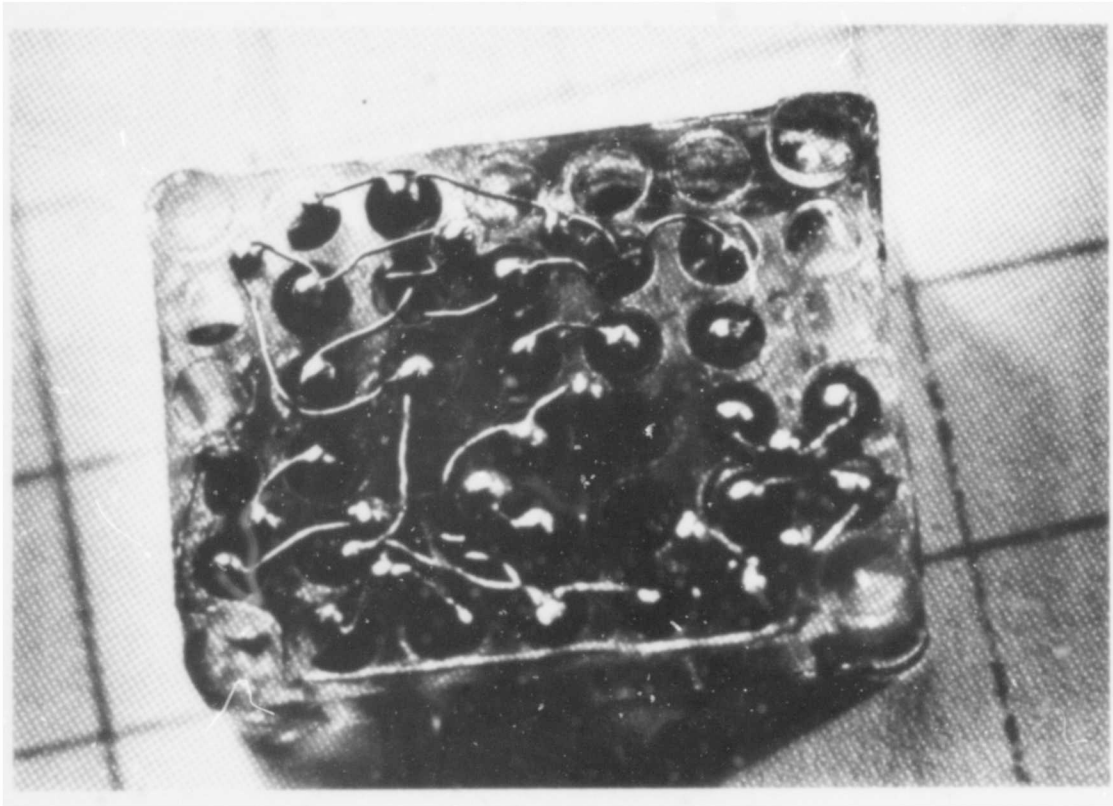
A Soldered Cordword Assembly Shown on a Background of 1/4-inch Squares.
